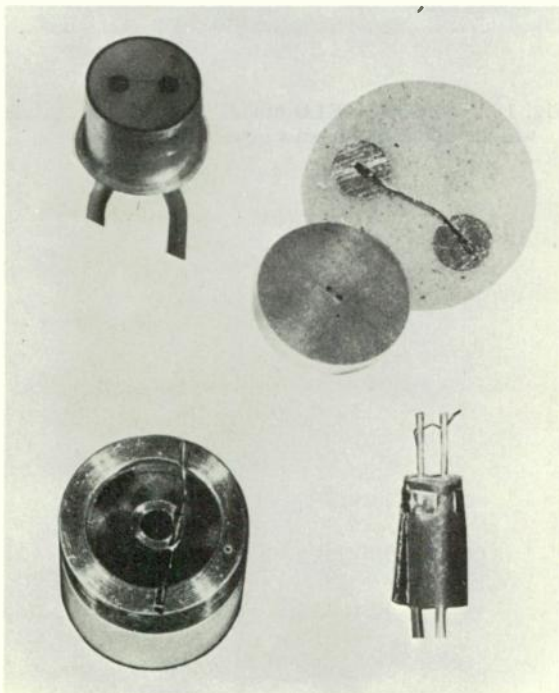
Several types of ultrasonically welded bridge-wire assemblies.
